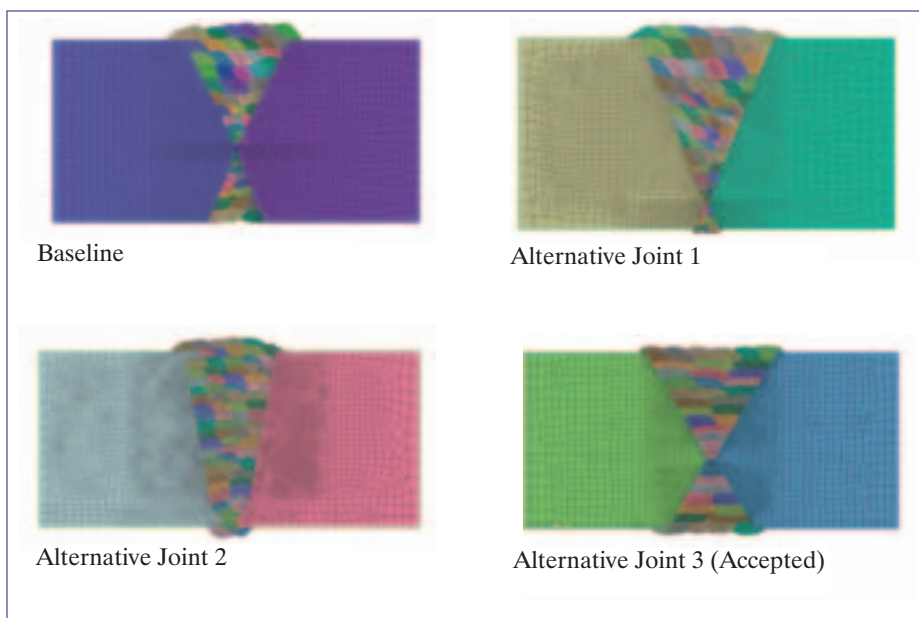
Illustration of thick-plate weld joint geometry, multipass weld-bead shape, and placement in a baseline condition, as well as three other alternative designs.
